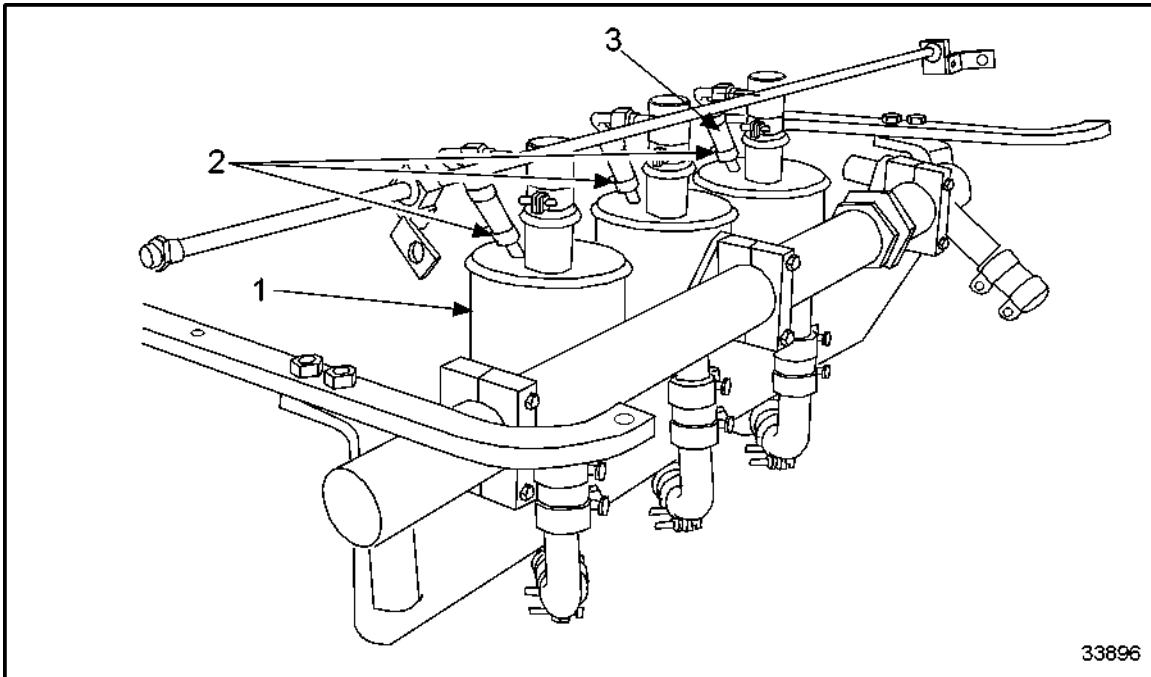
Removing Marine Cylinder Block Ventilation Assembly Bracket
